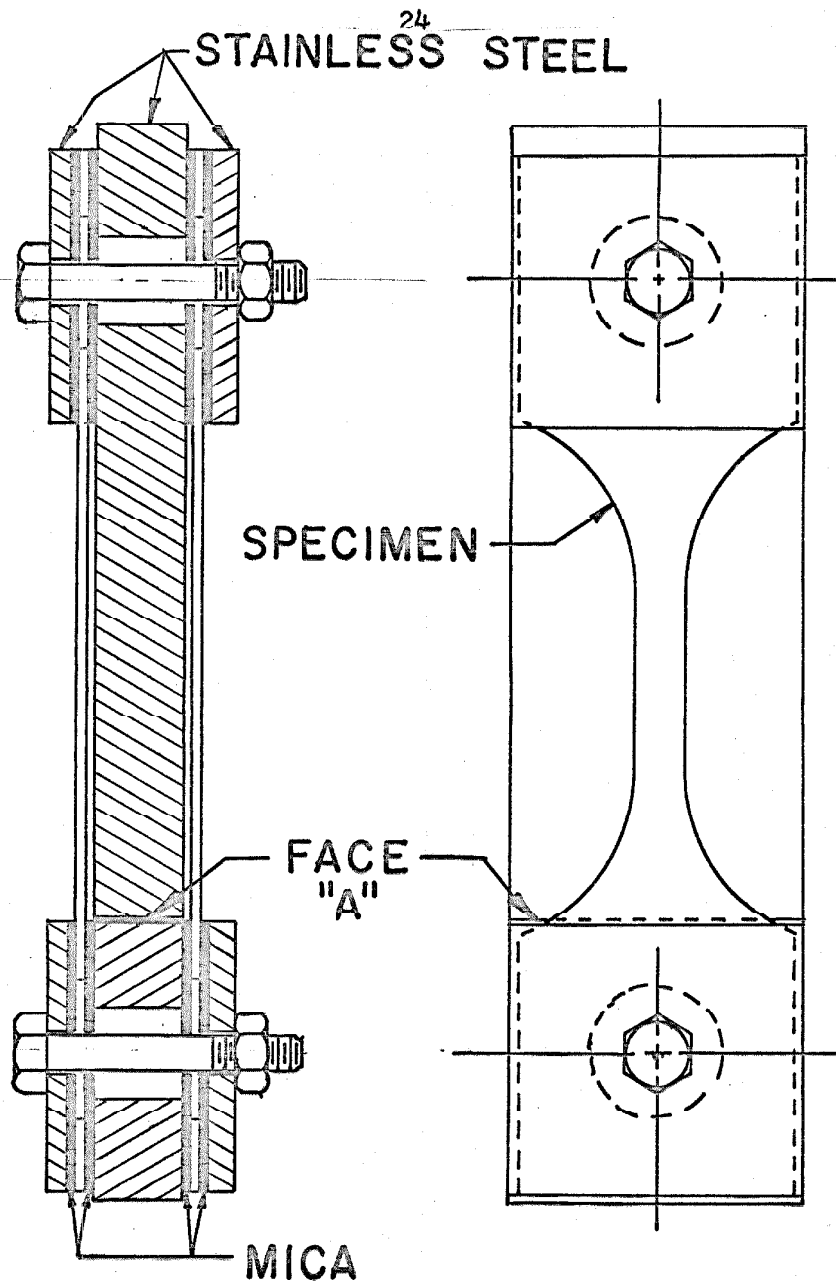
Cross-section drawing of heat treatment fixture for recrystallization of blanked specimens.
